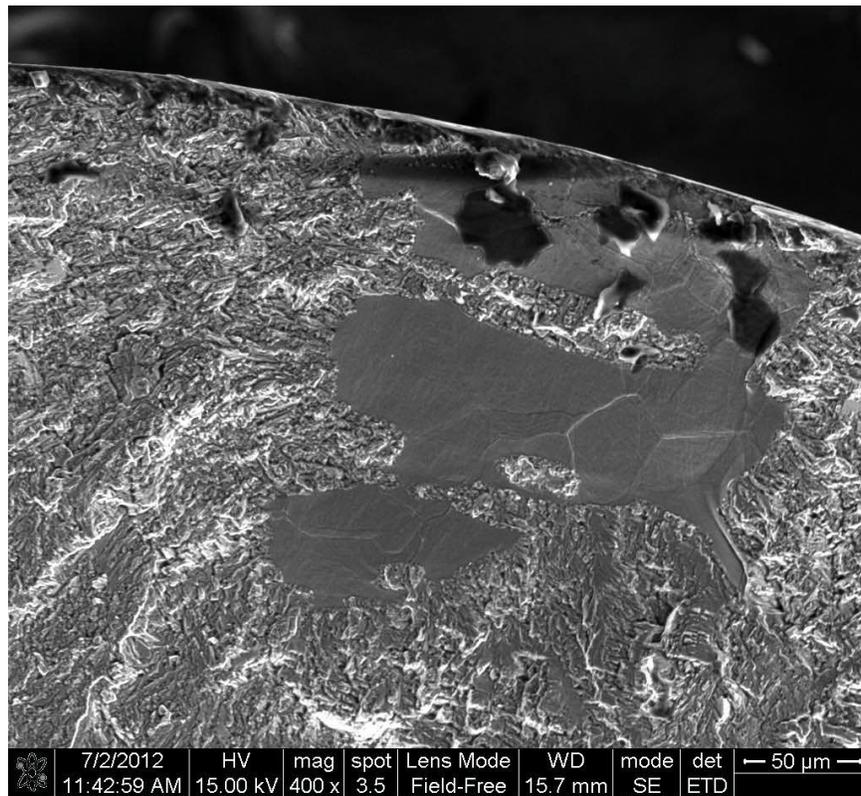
SEM image showing brittle mode of crack initiation for a machined part
